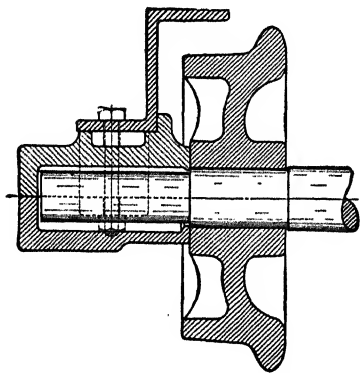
Arrangement in which wheel is fixed and the axle turns in bearing.
